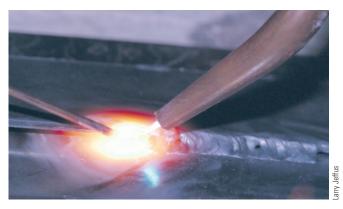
Changing the weld bead size by changing the torch angle.
